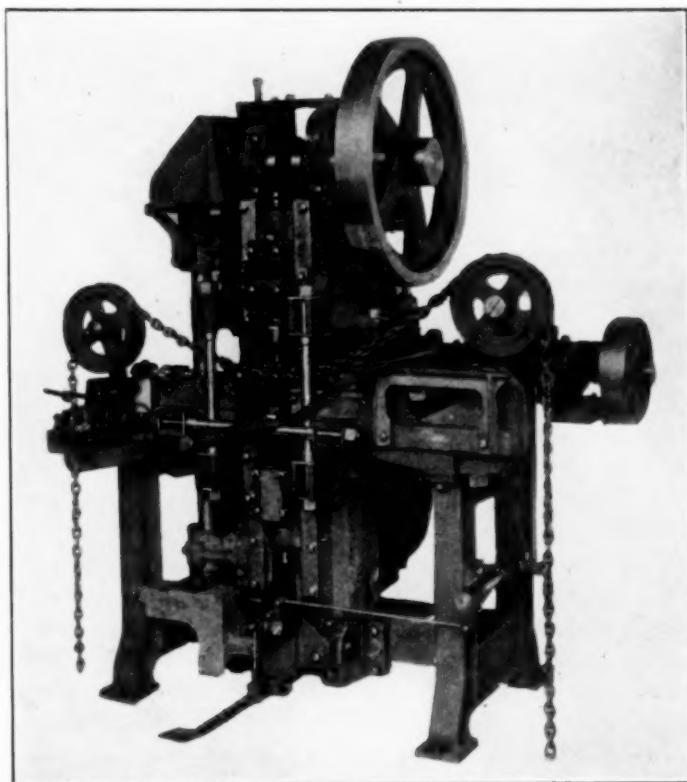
FRONT VIEW OF ELECTRIC CHAIN WELDER
